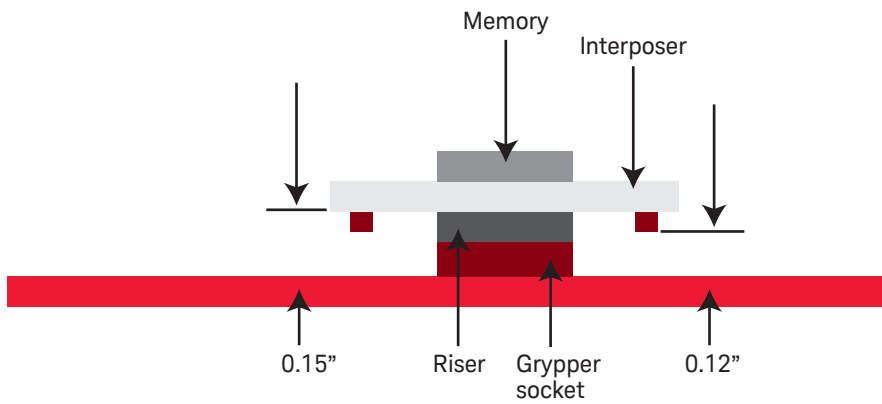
W4631A DDR4 x16 BGA interposer with riser plus optional grypper socket underneath.
